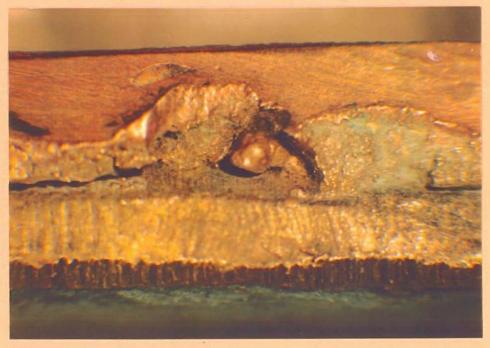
Close-up of Defects in Circumferential Weld
